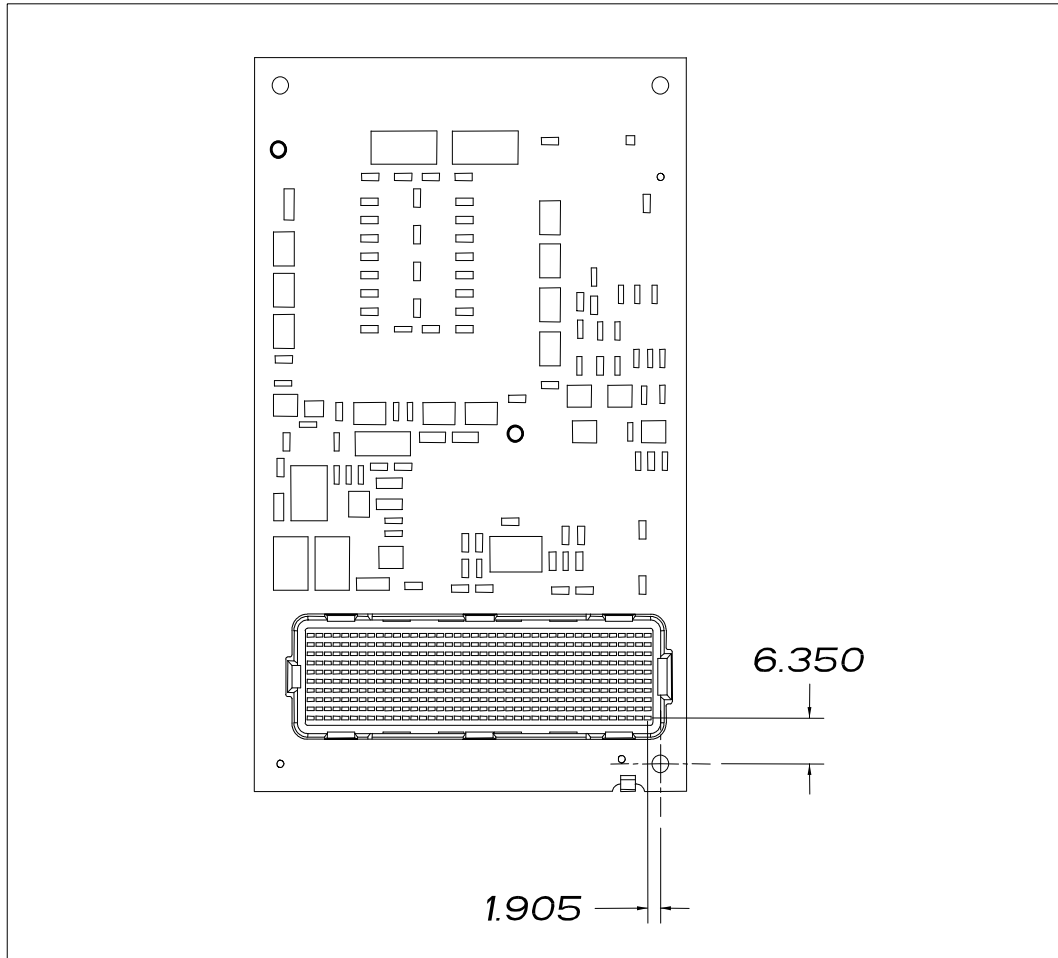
Board Dimensions and MMC-2 Connector Orientation
